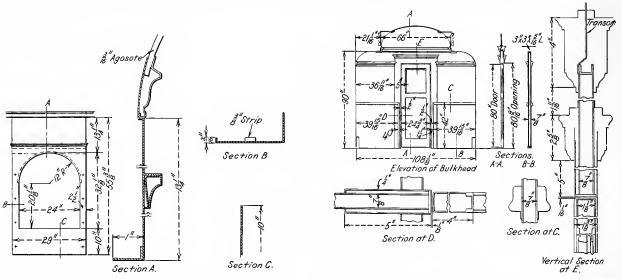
Steel Finish at Saloon Window. Dahlstrom Metallic Door Company.
